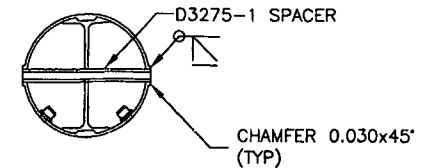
DETAIL B FOR $\phi 0.375$ HOLES ONLY
